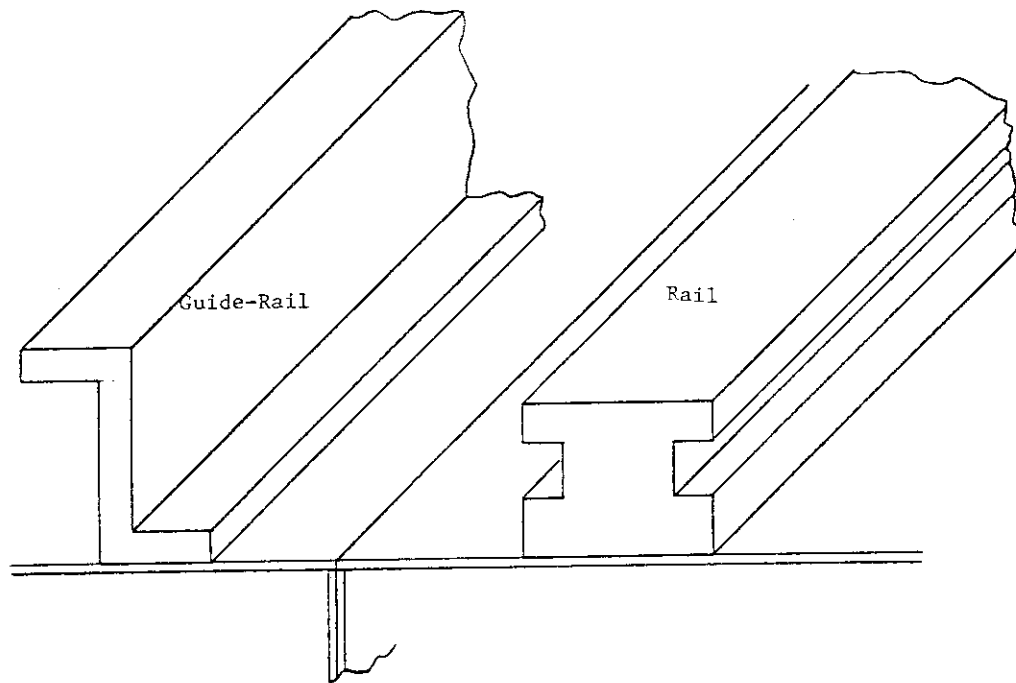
Rail for Automatic Welding Machine
